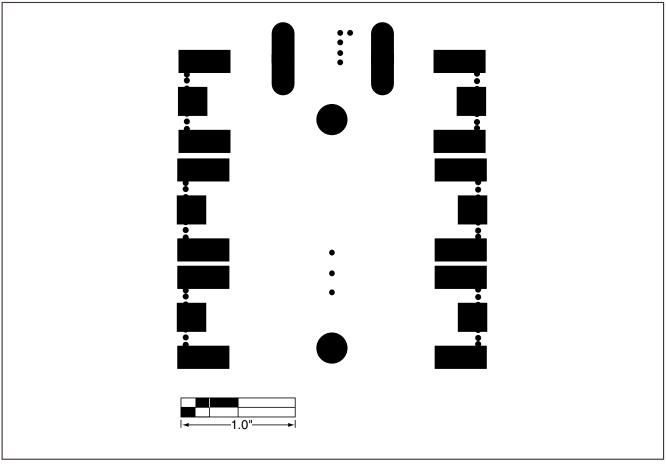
MAX3785 EV Kit PC Board Layout—Bottom Side
